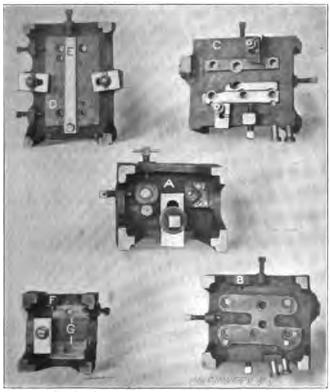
Miscellaneous Examples of Open Drill Jigs
